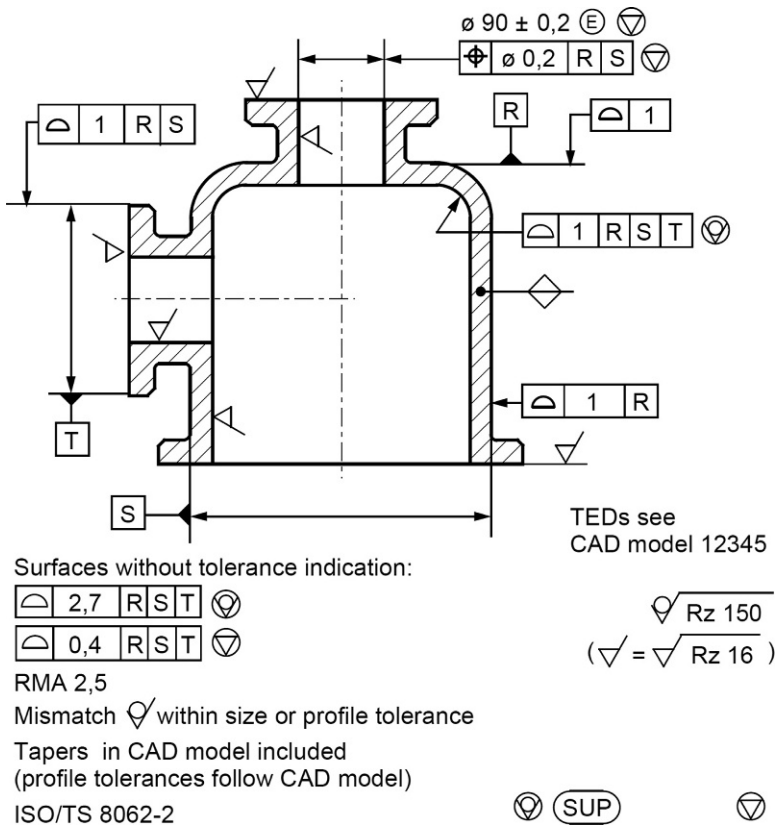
Machined casting with general tolerances for moulded and machined surfaces
